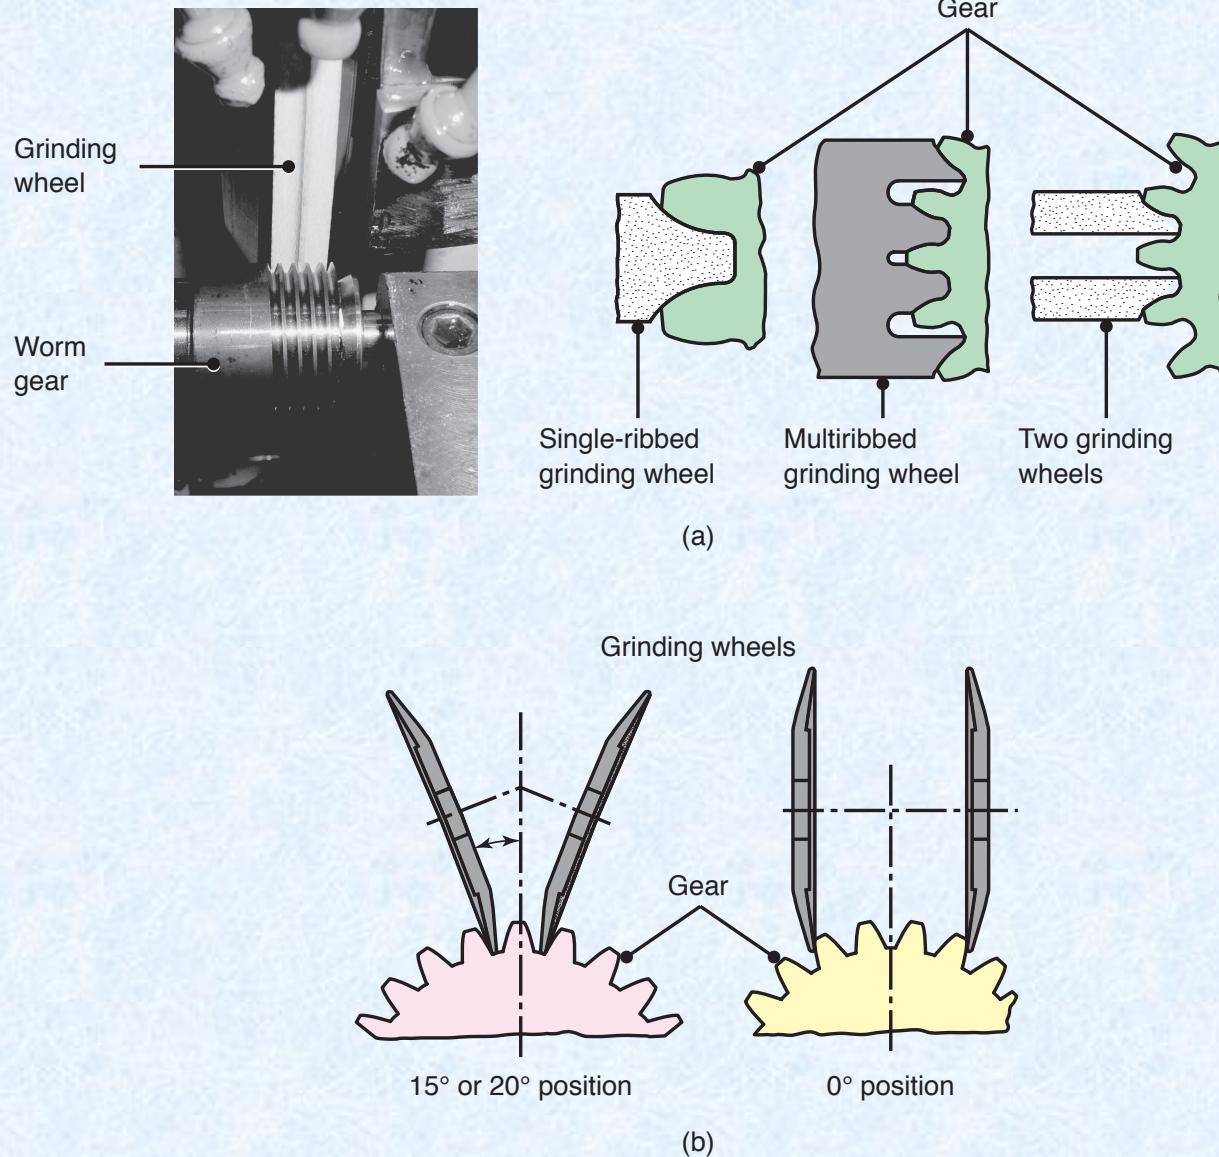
Finishing gears by grinding: (a) form grinding with shaped grinding wheels; (b) grinding by generating, using two wheels. *Source:* From Kalpakjian and Schmid [2010].
